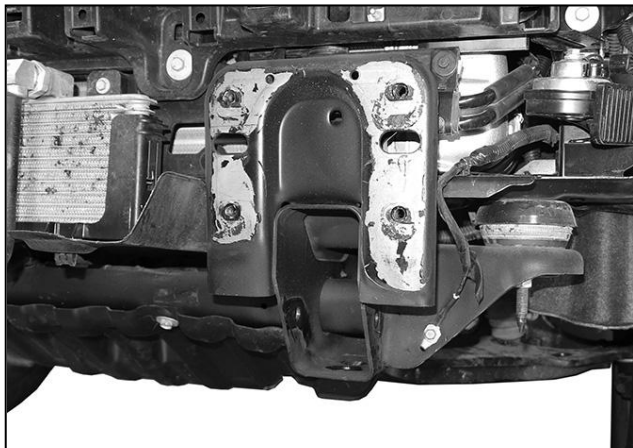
Remove bumper supports attaching outer end of bumper to frame (arrow)
